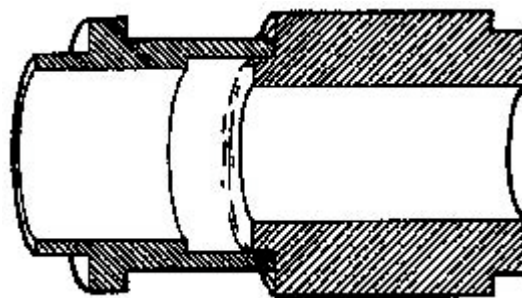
Brass component sectioned to show brazing alloy penetration (magnified)
